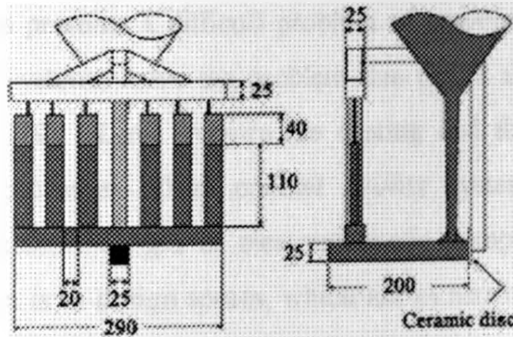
Conical pouring basin tested in an investment casting filling system for an aluminium alloy [128]
